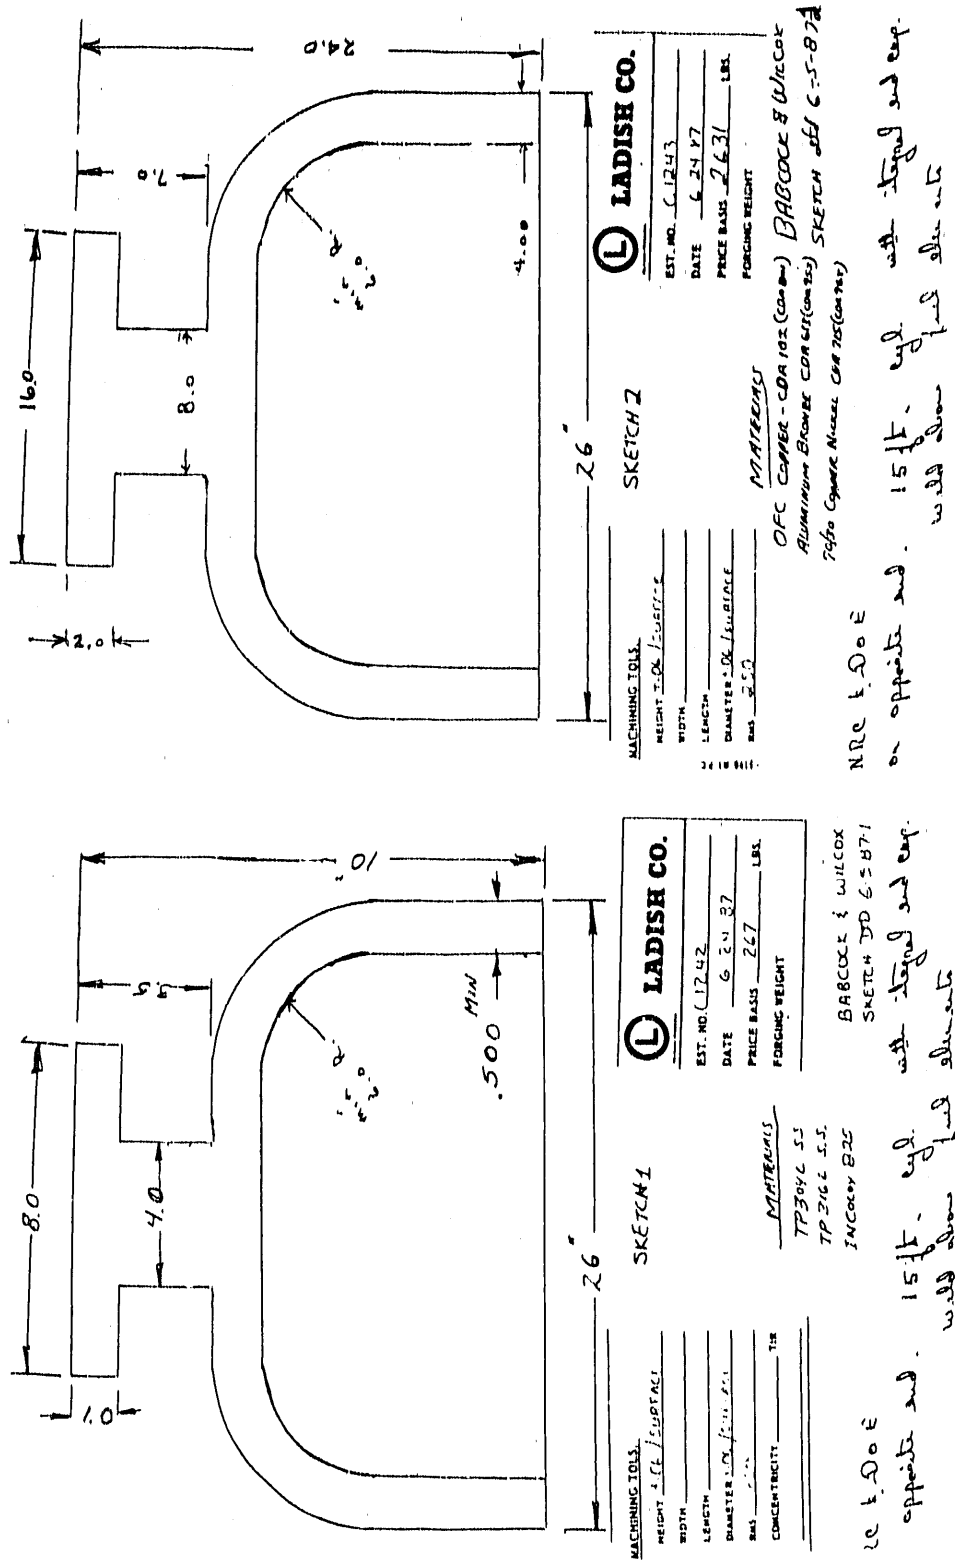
Alternate configuration sketch used for integral pintle and head forging quotes
